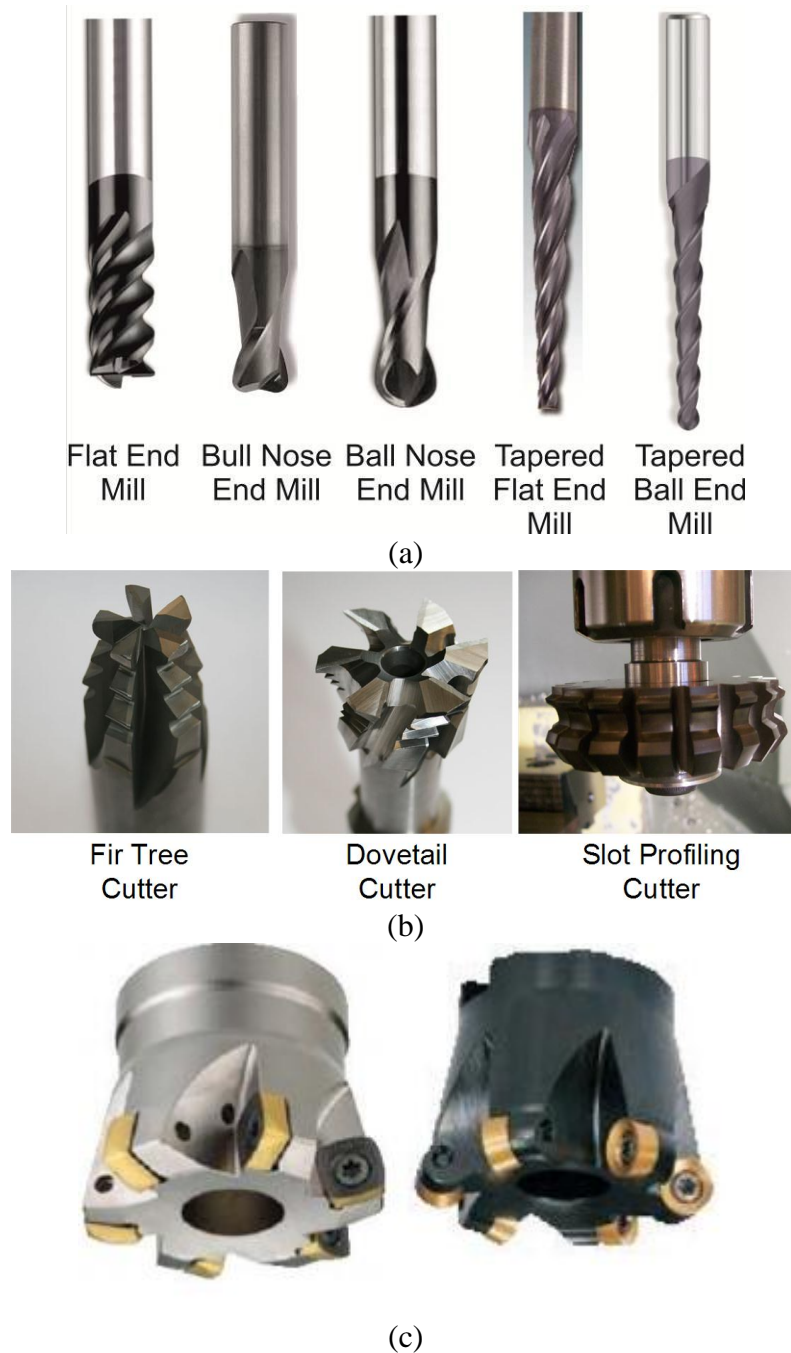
Different tool geometries (a) standard helical tools, (b) custom profiling tools, (c) face milling inserted tools
